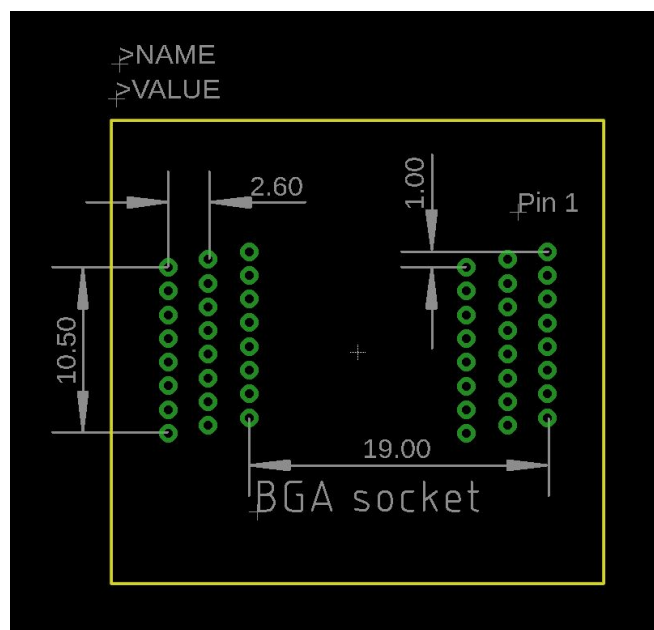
A custom component was created for the purchased BGA socket. The image indicates the dimensions that were used for the holes on the PCB to accommodate the socket pin layout.
